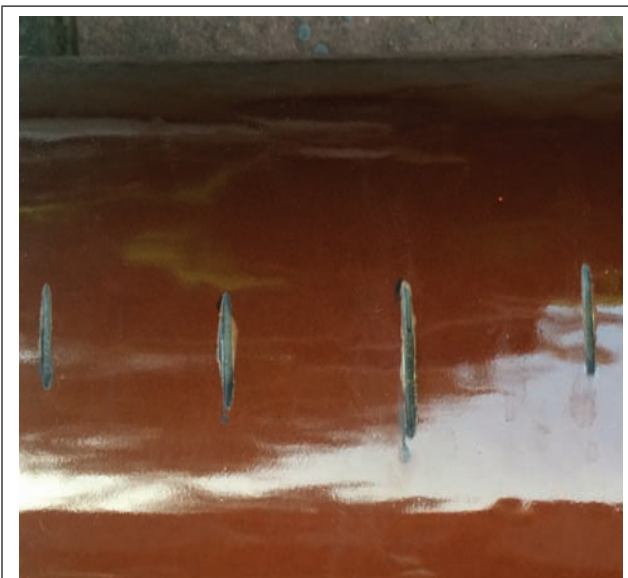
ARTIFICIAL SURFACE DEFECTS
